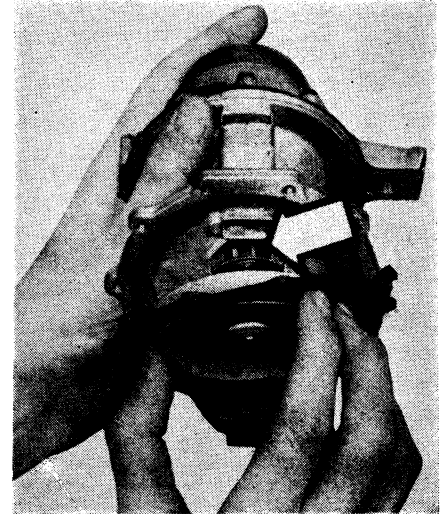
Series AJ. Assembling body to cover, matching marks previously made
